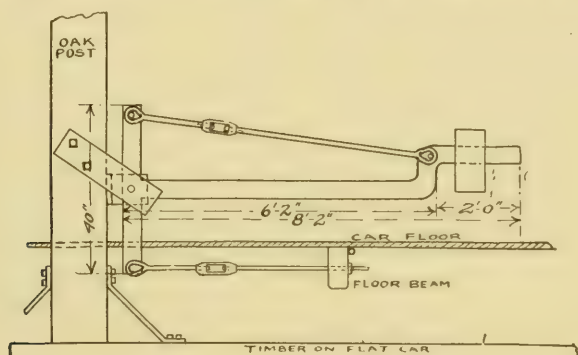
Sketch Showing General Arrangement of Car Body Counterweight.
